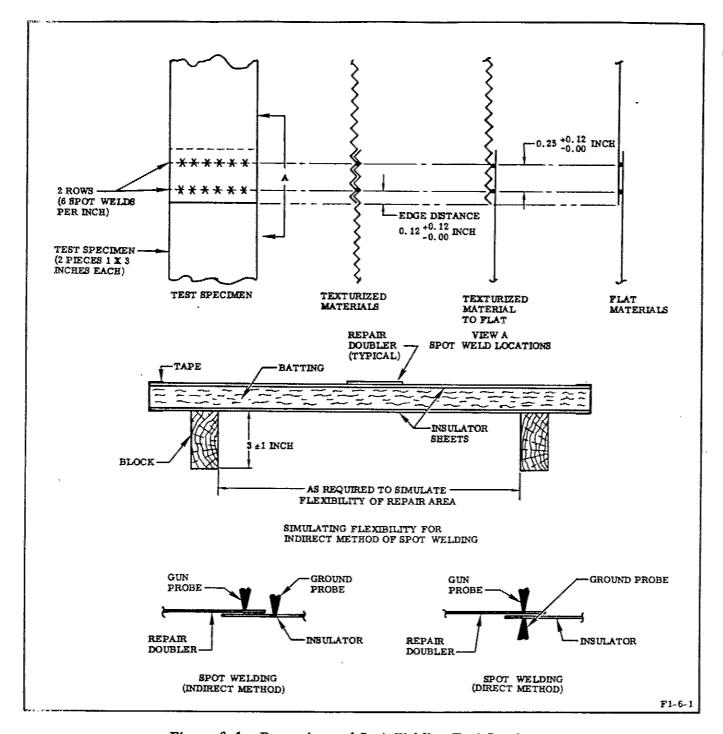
Preparing and Spot-Welding Test Specimens
